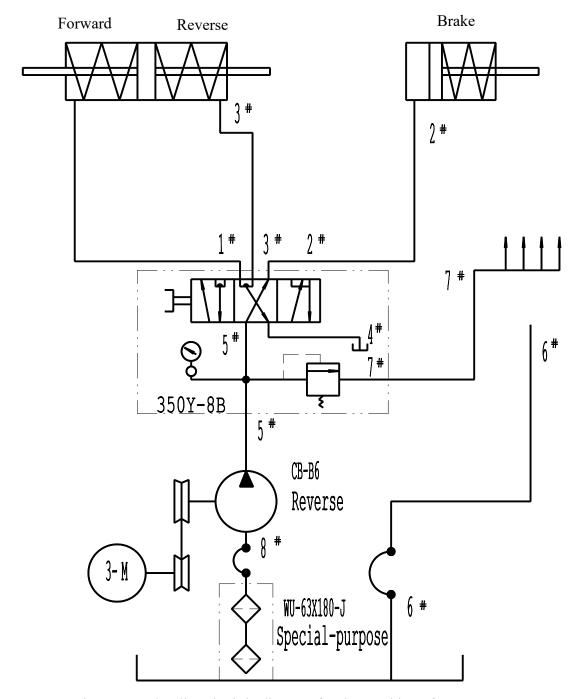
Hydraulic principle diagram for the machine of 1.5-3m
